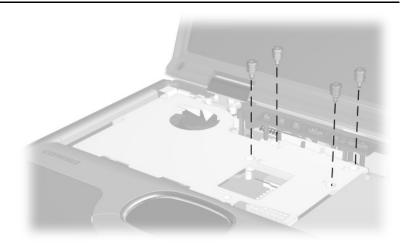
TM2.5 × 14.0 Shoulder Screw Locations
